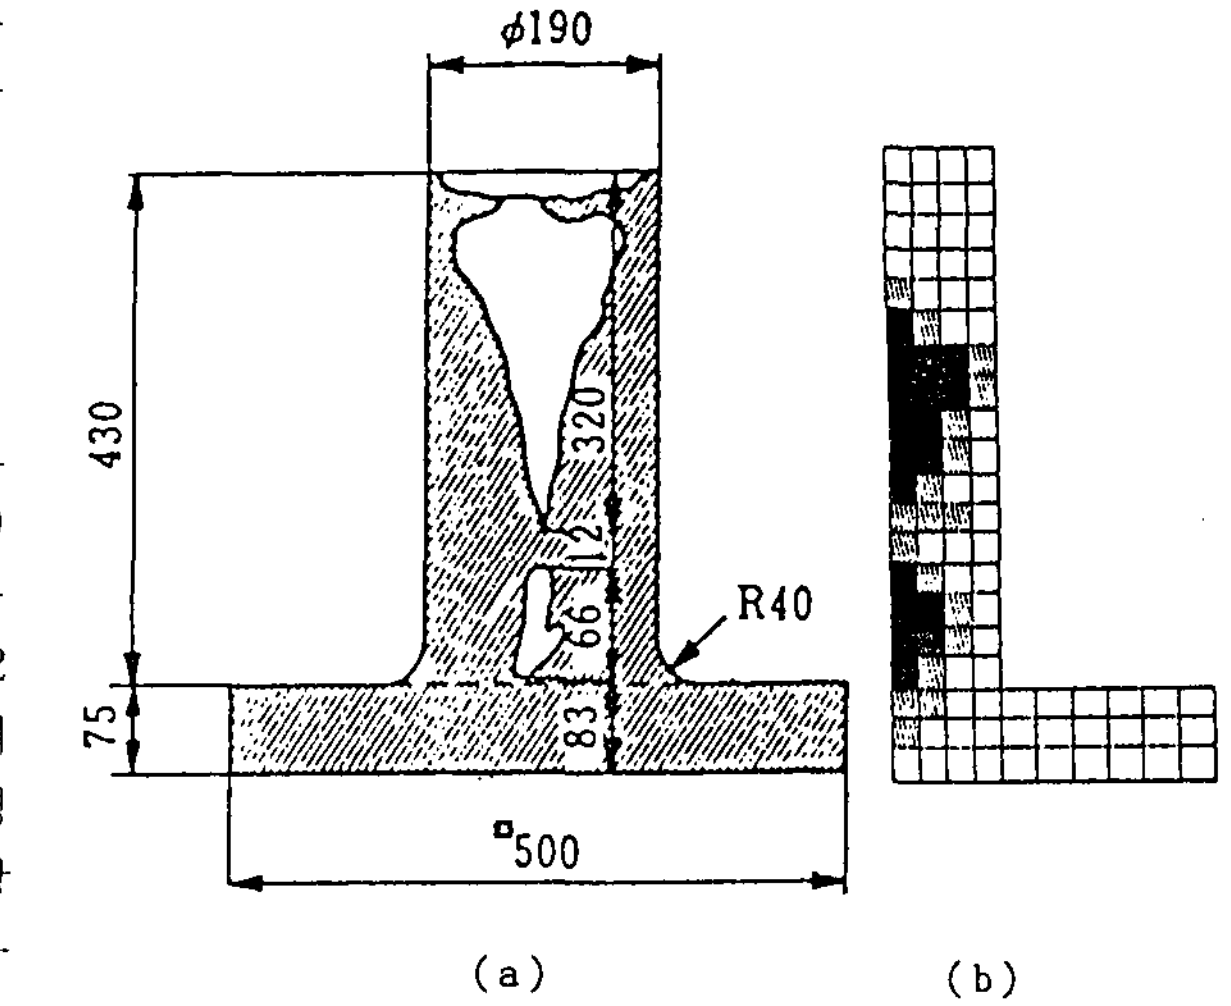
Prediction of shrinkage defects in carbon steel castings. (a) Experiment[7] (b) Calculation by FDM
